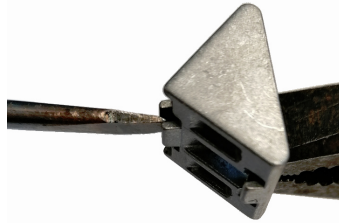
Remove the alignment tabs when attaching two perpendicular profiles.
